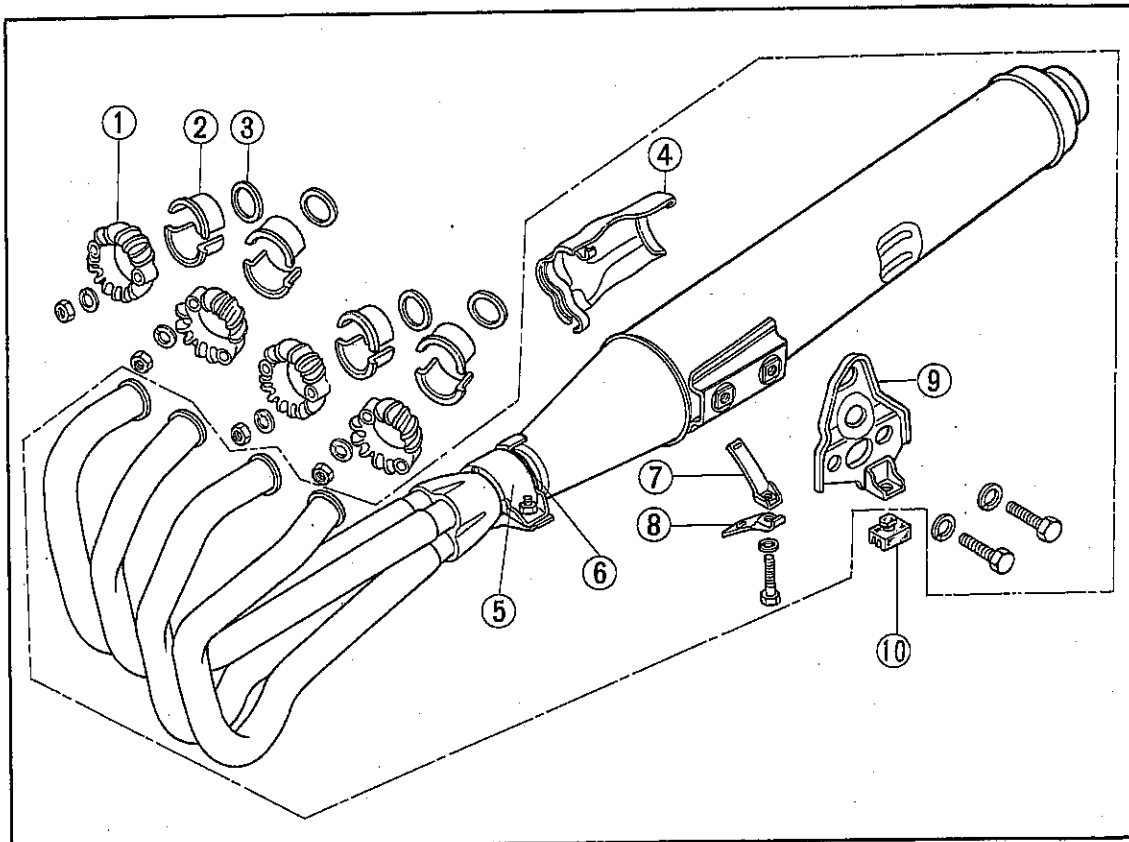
① Exhaust pipe joint ⑤ Muffer band ⑨ Muffer stay
